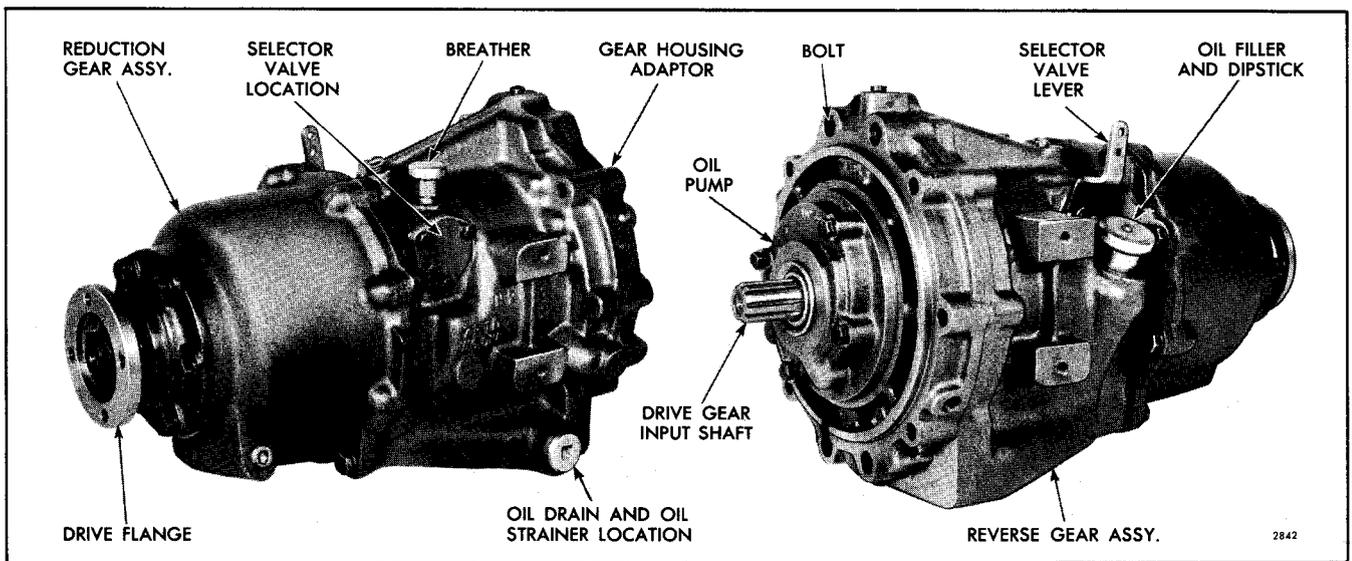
Three Quarter View of Former Reverse and Reduction Gear Assembly
